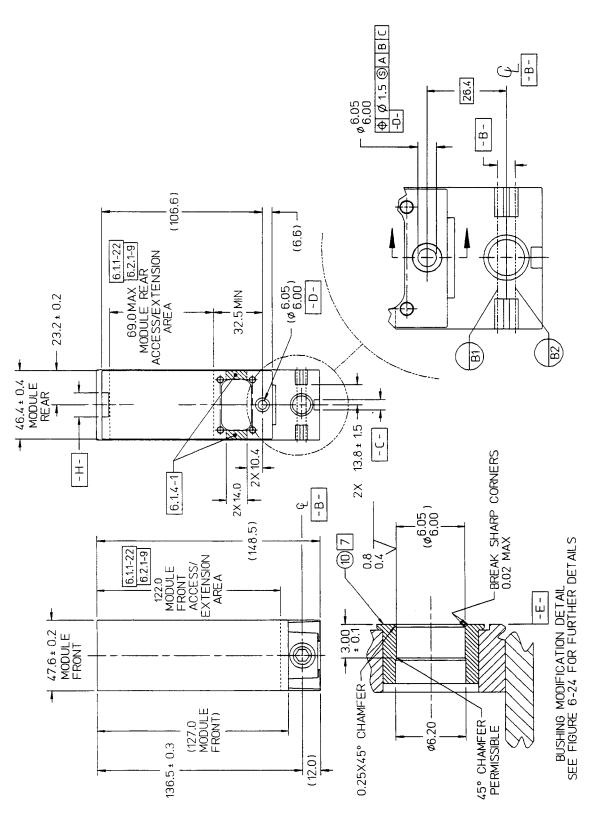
1 SLOT MODULE FRONT & REAR DETAILS
